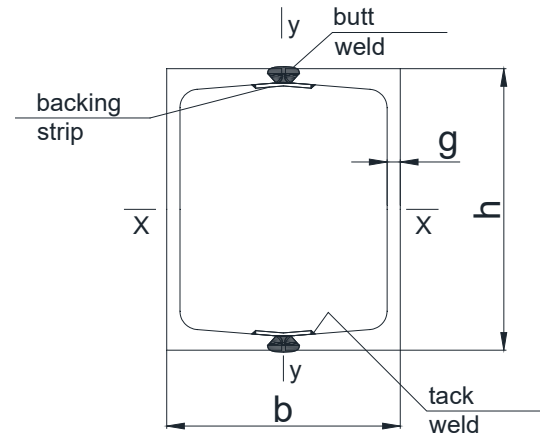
Cross-section of a steel guide made of channel sections [9]
